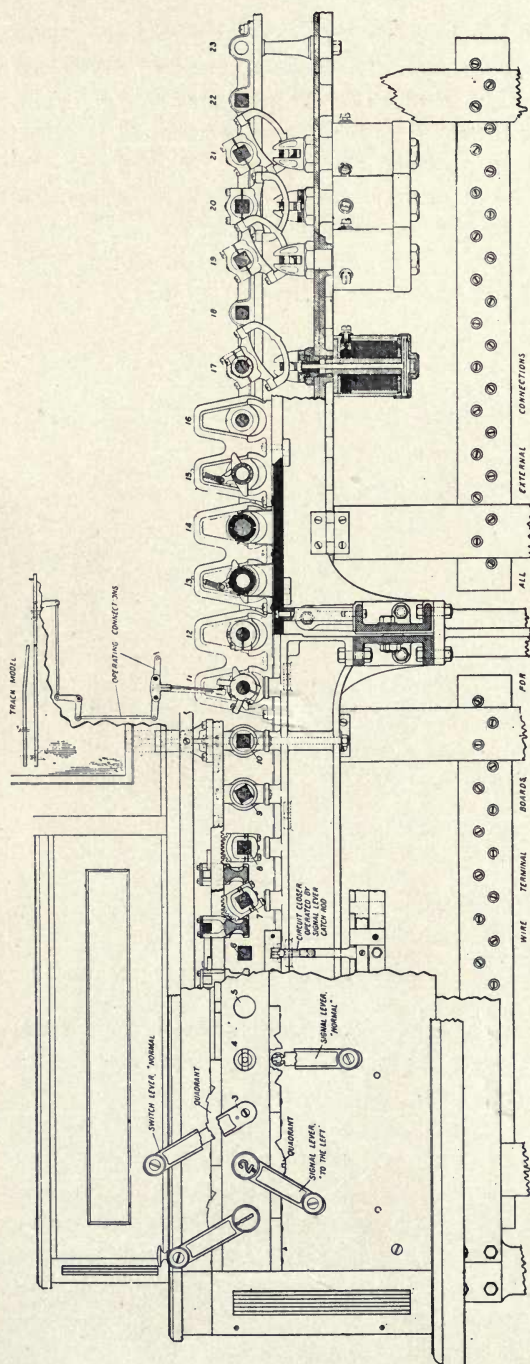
SECTIONAL VIEW OF ELECTRO-PNEUMATIC INTERLOCKING MACHINE
